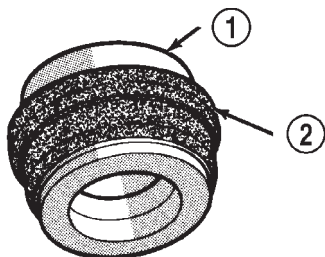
DUST BOOT ON PISTON - TYPICAL
